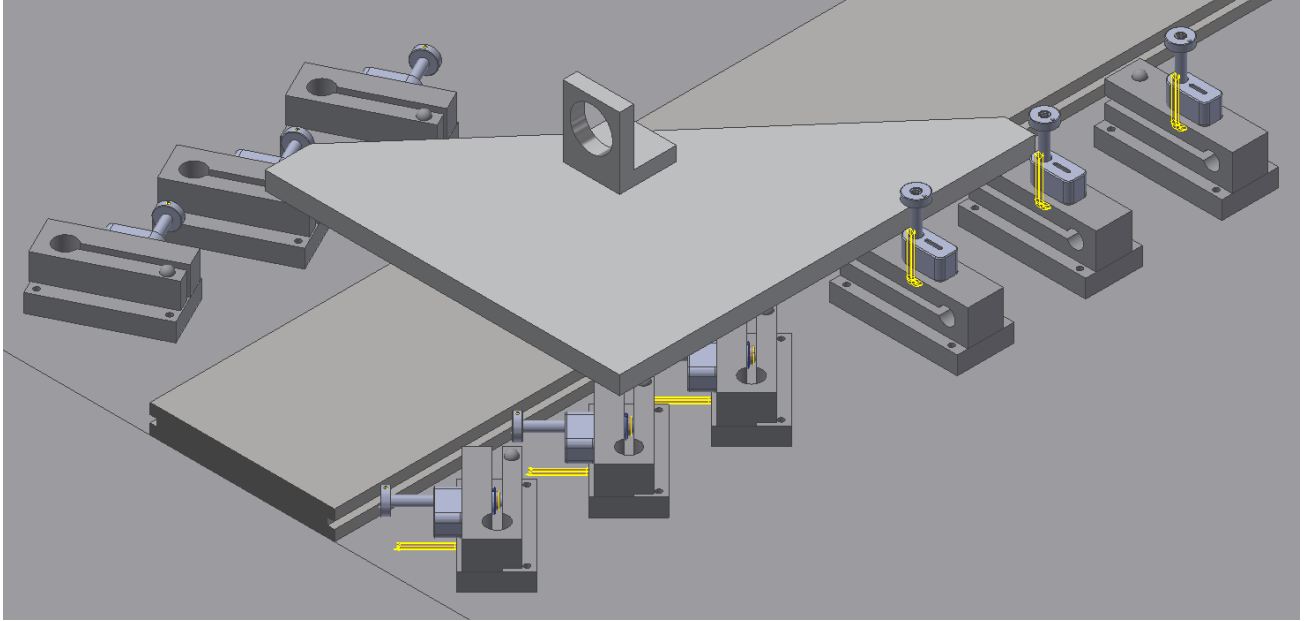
One mirror/dichroic mount of the switchyard shown kinematically mounted on a set of 3 ball bearings. A carriage underneath the mirror mount allows the mount to be lifted up, moved along the slide and lowered onto a different set of 3 ball bearings under computer control.
